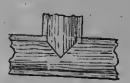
Plan of Umbrella Stand's Top-rail Joint.
